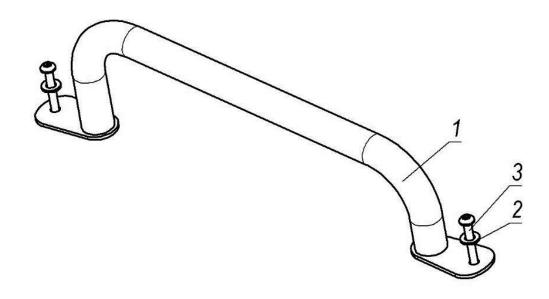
Completeness and assembly scheme of the slide with attachment to the complex
